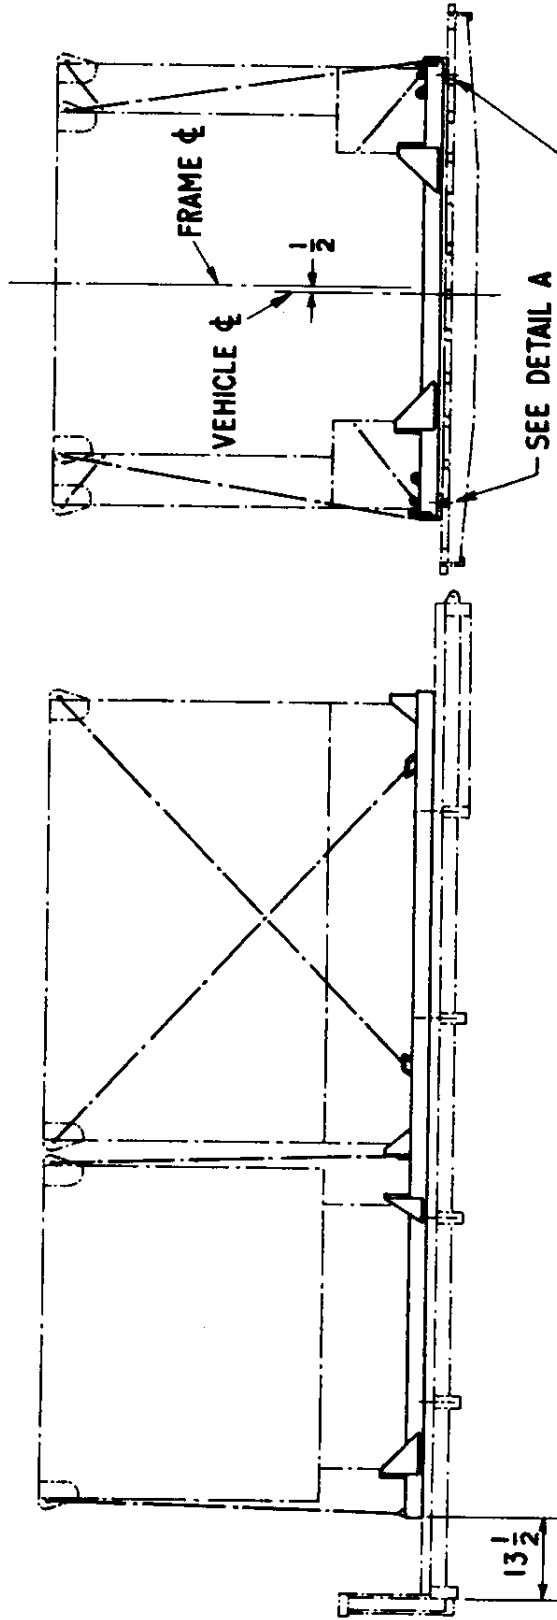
INSTALLATION, FRAME, ASSEMBLY, MOUNTING SHELTER ELECTRICAL S144/G
